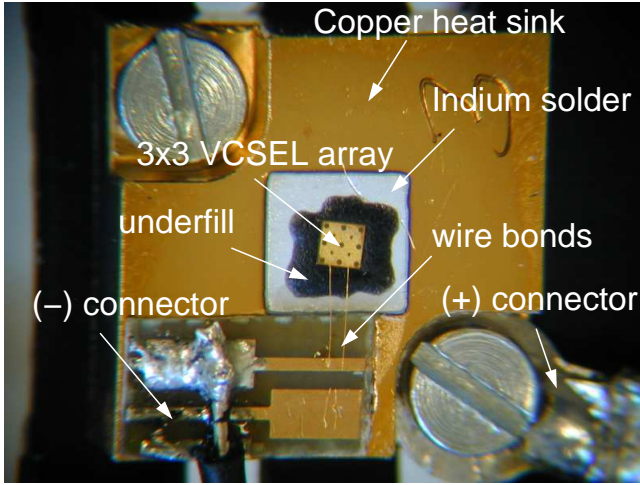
Laser module containing the 3×3 VCSEL array. The array chip is soldered with indium to the gold-plated copper heat sink.
